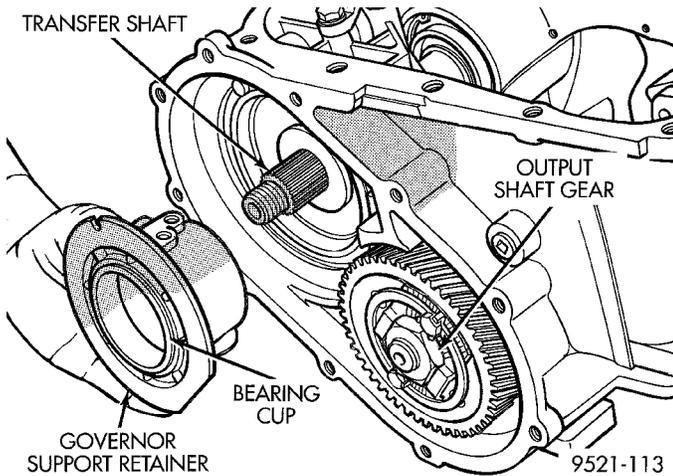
Remove Governor Support Retainer Bearing Cup
